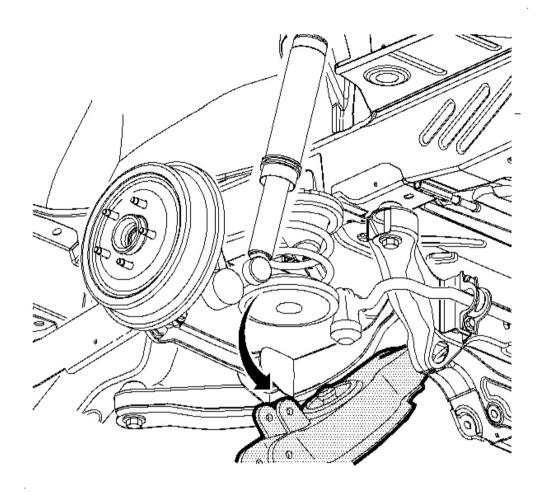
Control Arm & Coil Spring Courtesy of GENERAL MOTORS CORP.
